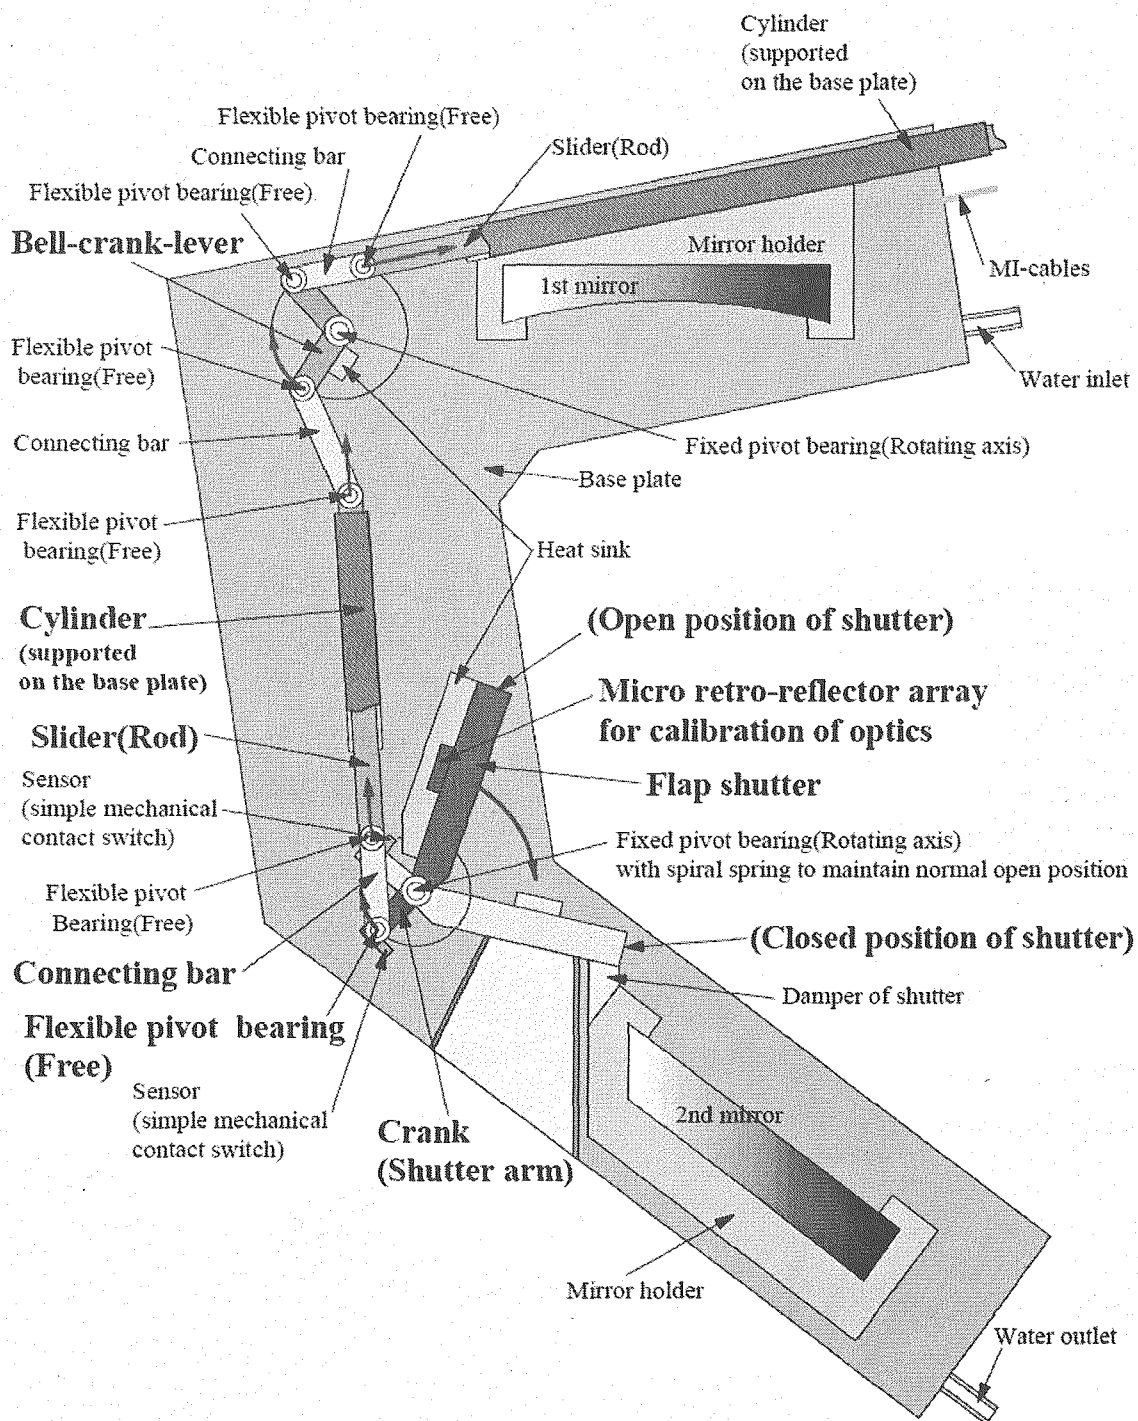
(c) Main parts of the flap type shutter mechanism installed in the upper port plug.
